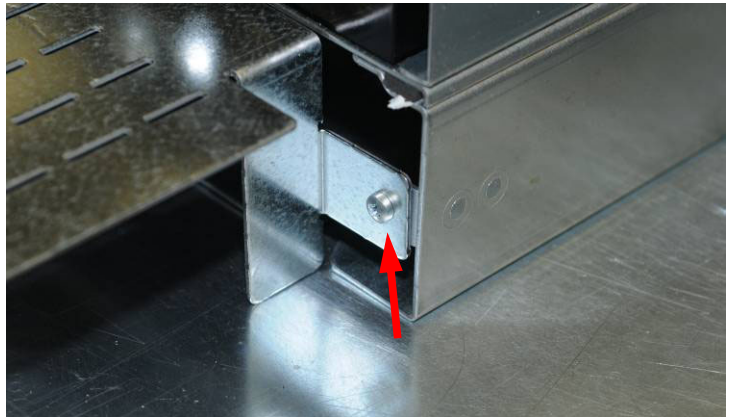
Cable-clamp bracket mounted on mounting tab, right side of D3/D4 frame.
